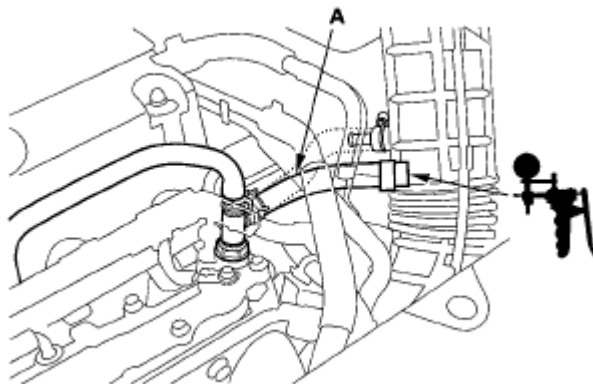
Identifying Vacuum Hose Of Intake Air Duct
